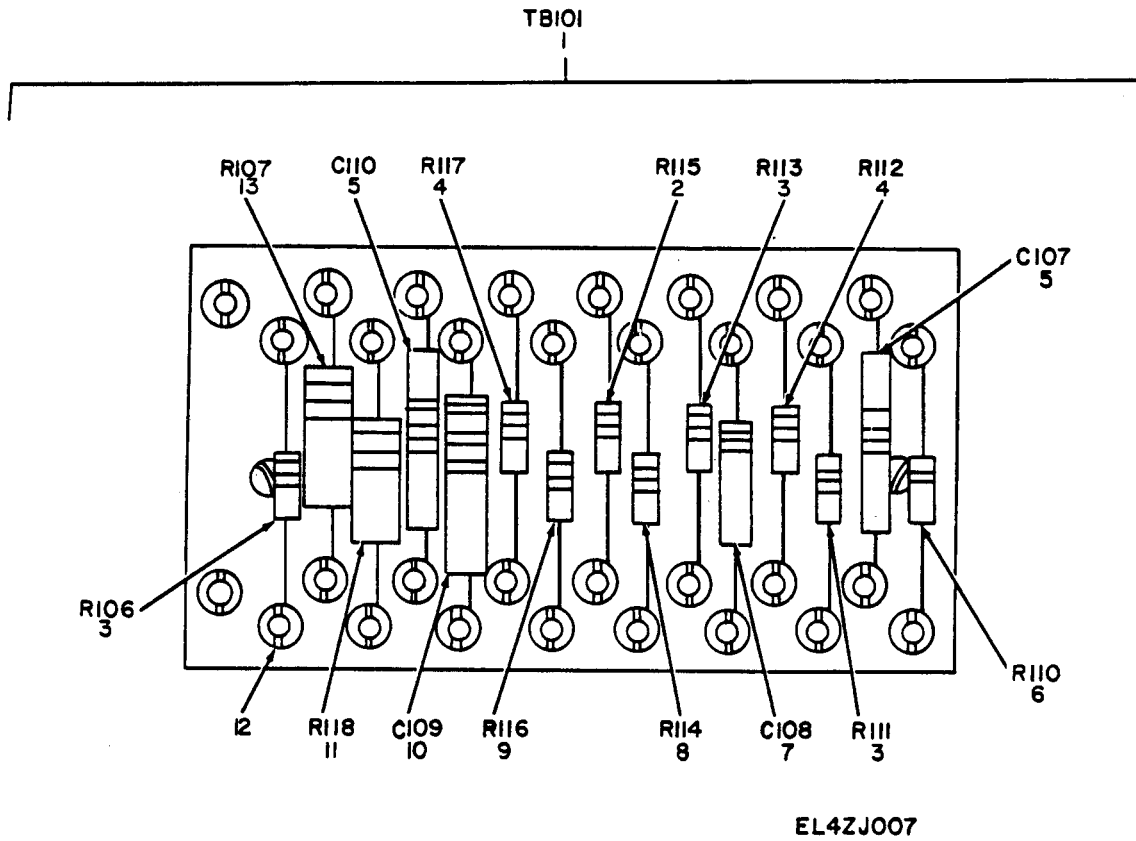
Frequency Standards TS-65C/FM0-1 and TS-65D/FM0-1, Terminal Board Assembly.
